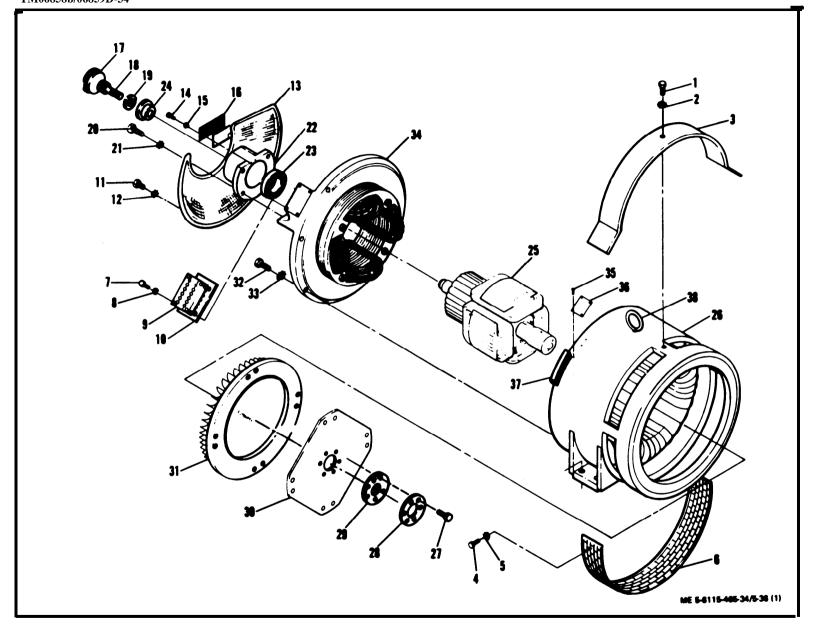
Generator Assembly, Exploded View (Sheet 1 of 2)
